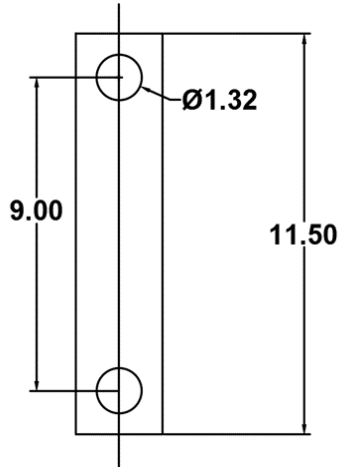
Geometry of in-situ TEM tensile specimen (unit: mm)
